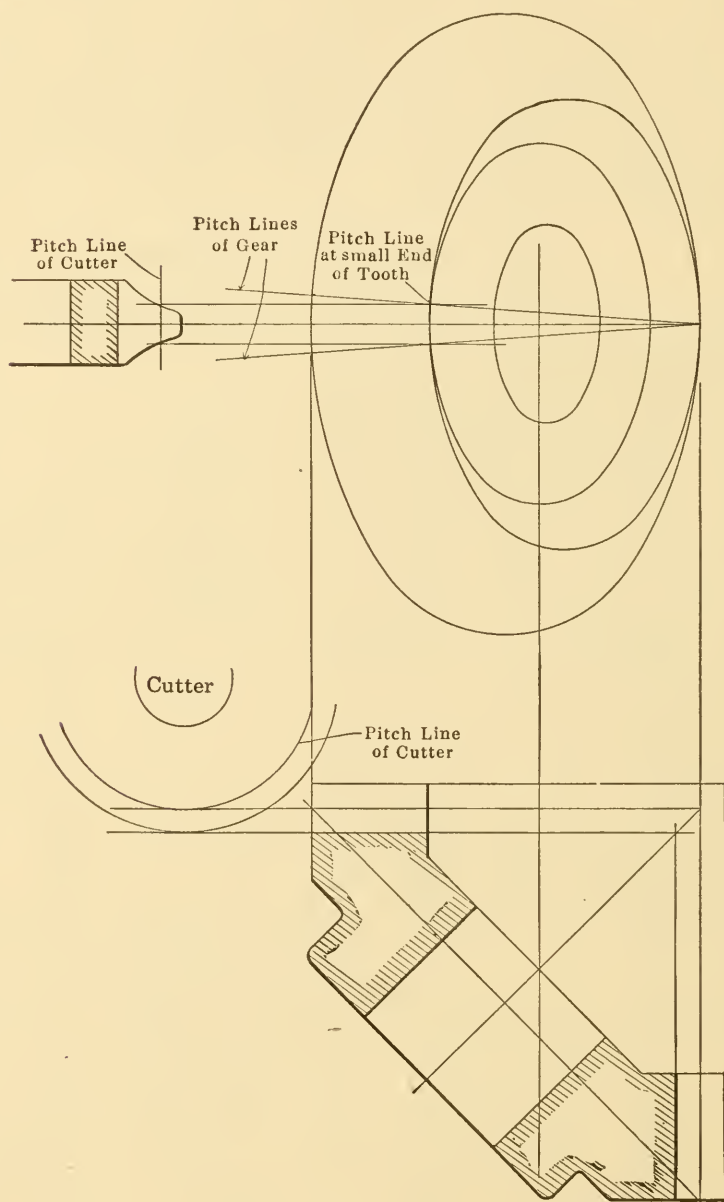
FIRST CUT IN MILLING BEVEL GEARS.
